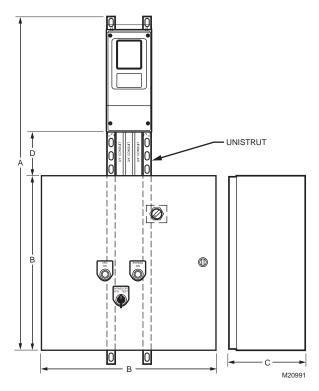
Dimensions of the NXS NEMA1 Assemblies.
